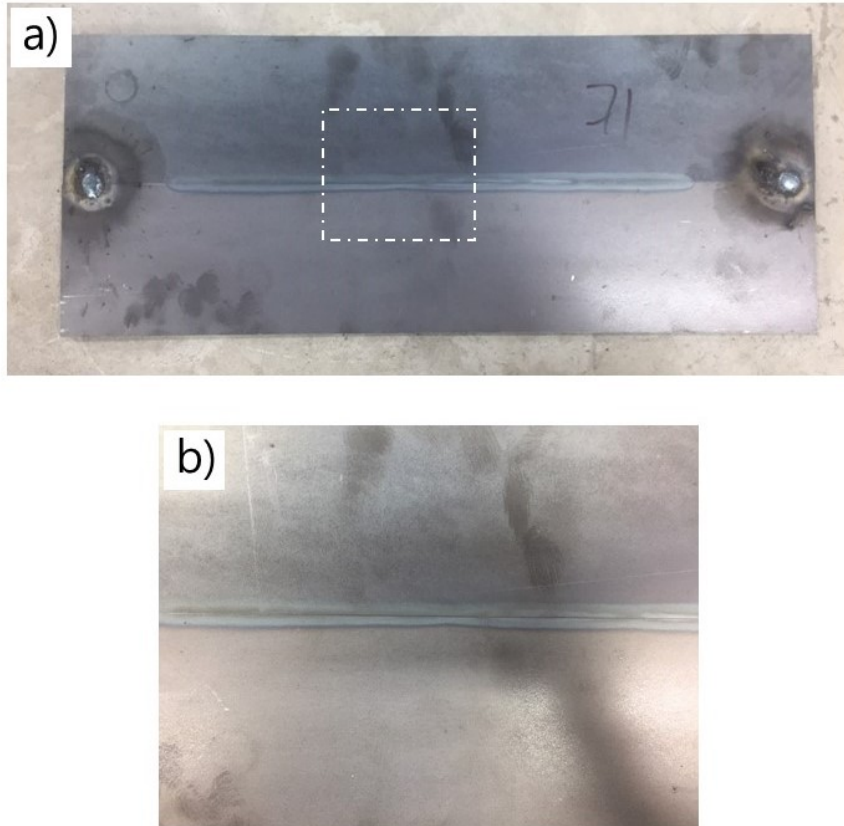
Burn through specimen resulted after the experiment a) being the welding sample and b) is closer view of the weld back bead.
